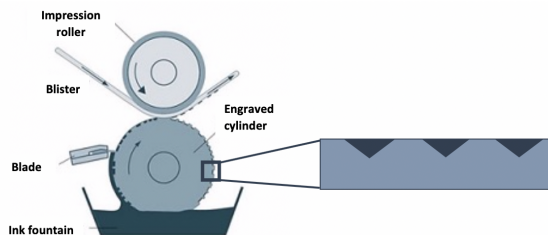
The printing process using rotogravure. Cylinder cells shown are a graphical illustration of electronic/mechanical engraving
